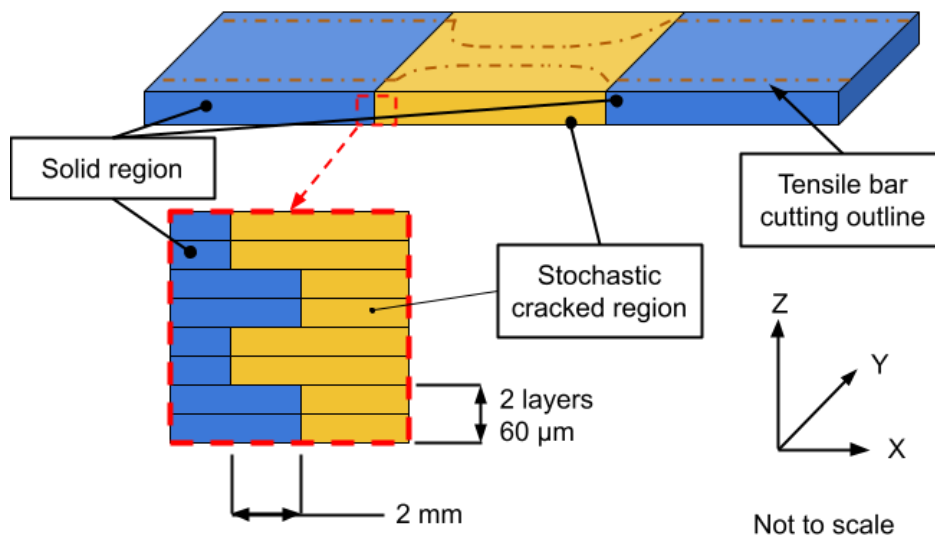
Details of the additively manufactured blocks, that tensile test samples were machined from.
